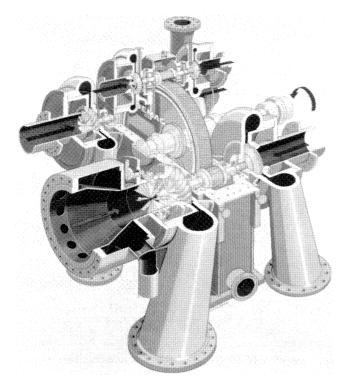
Six Stage Integrally Geared Centrifugal Compressor.
